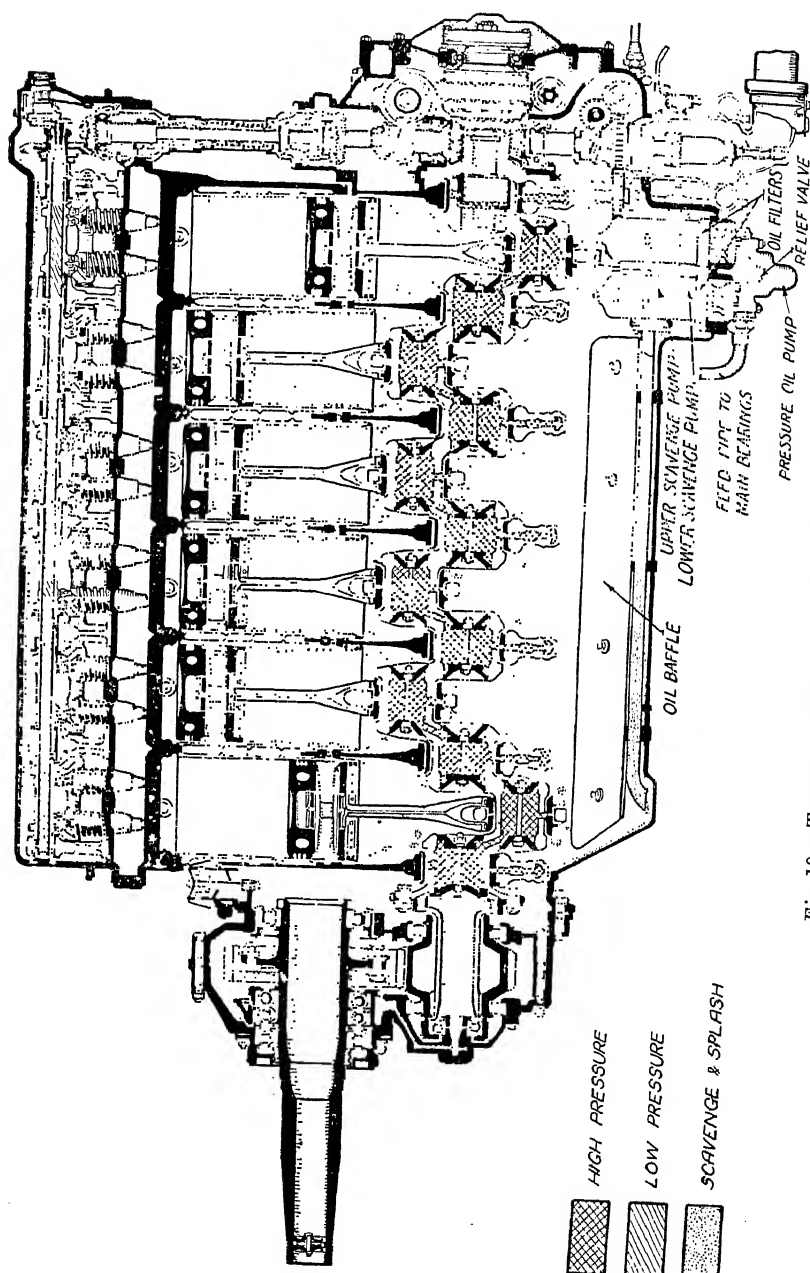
TYPICAL PRESSURE LUBRICATING SYSTEM.
